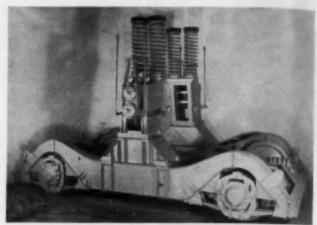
View of Truck Assembly Used in Experimental Car—Stiffeners Welded
